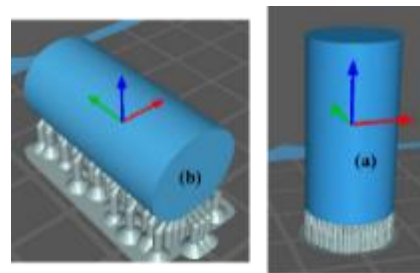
Compression test specimens ASTM D695 printed at; (a) On-Vertical, and (b) On-Horizontal directions.
